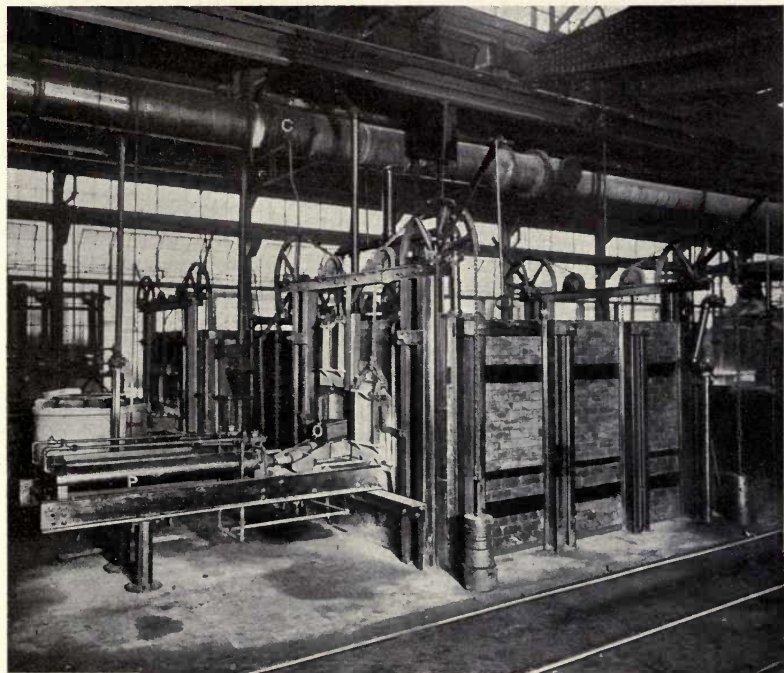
Intake End of Special Furnace for Hardening Forging Dies.
